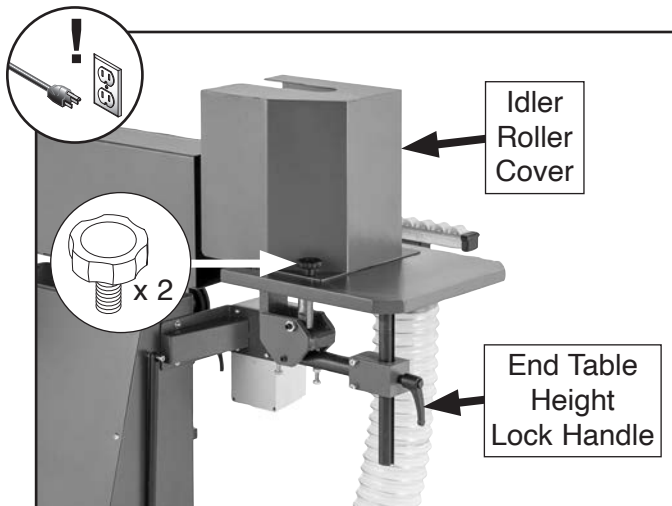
Location of idler roller cover knob bolts and end table height lock handle.
